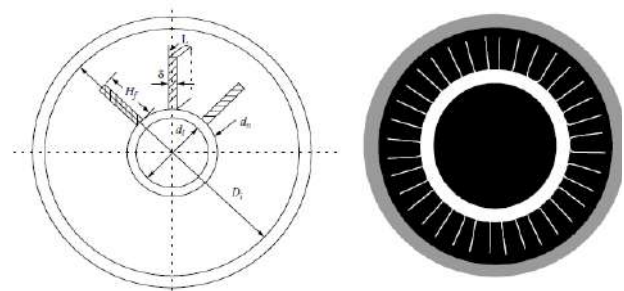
Cross section of a longitudinally finned inner tube heat exchanger and nomenclature of the initial parameters.
